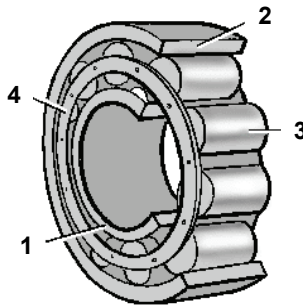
The treated roller bearing. 1. inner ring, 2. outer ring, 3. roller, 4. cage
